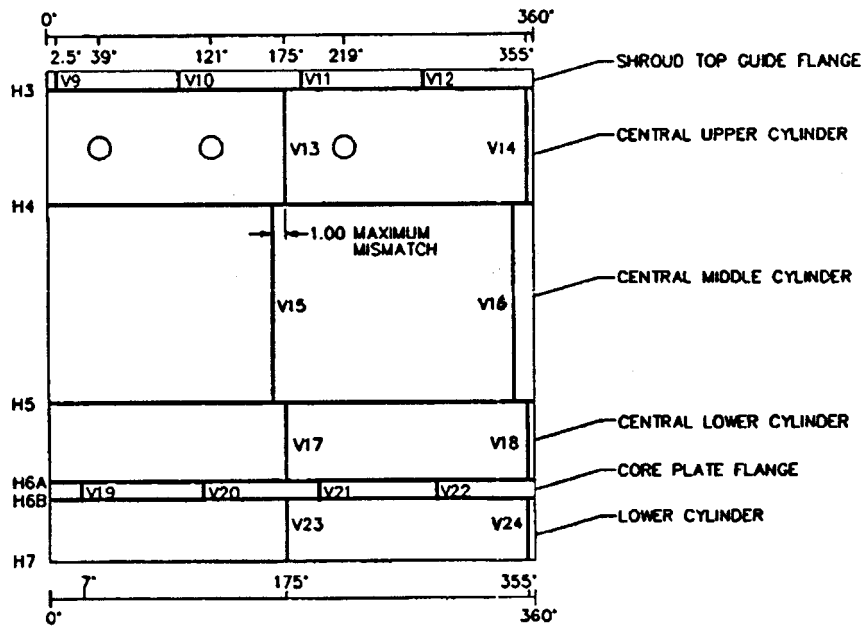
Weld Designations for GGNS Shroud.
